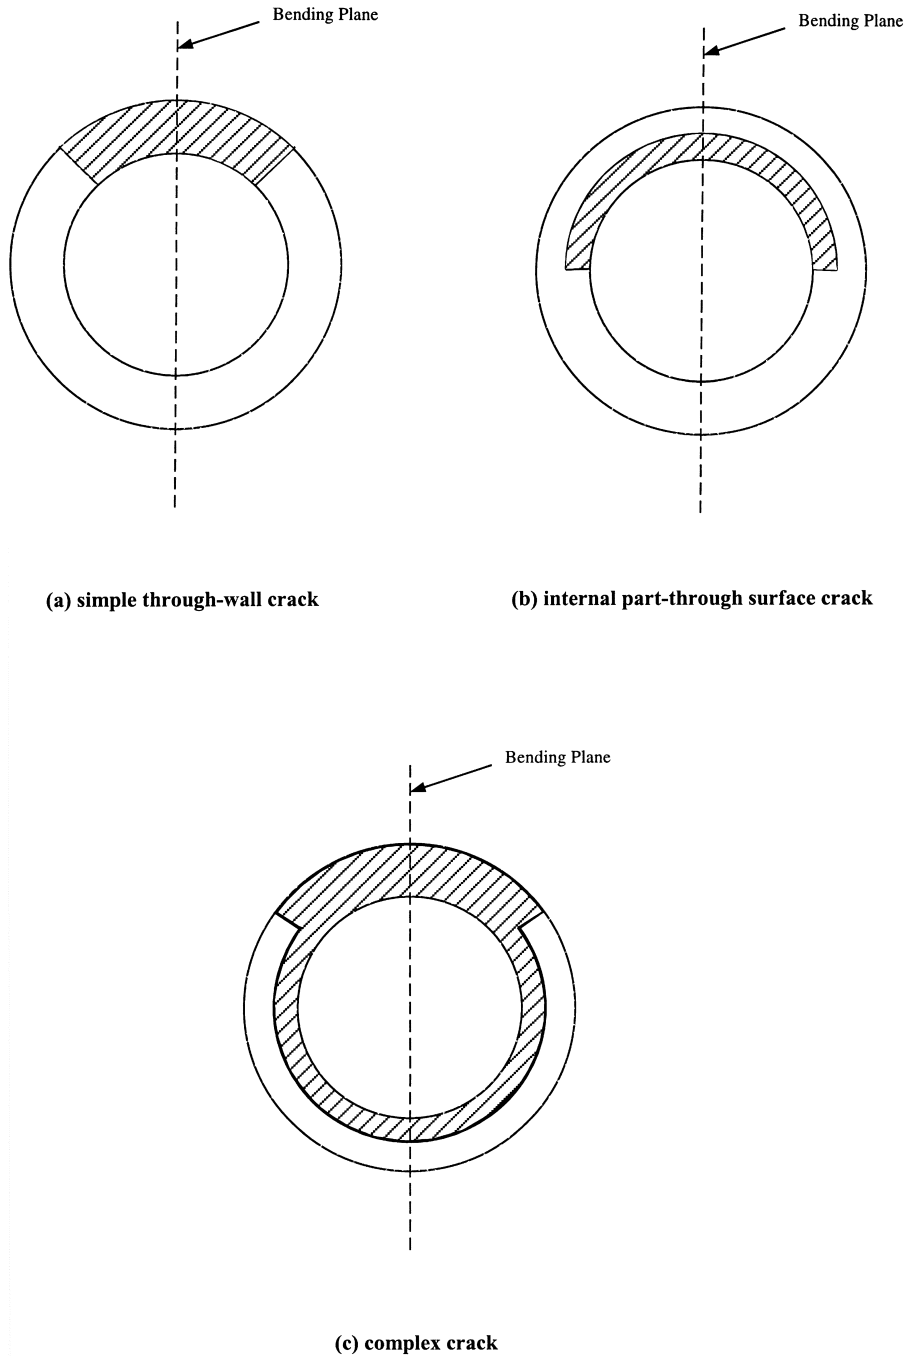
Examples of symmetrically centered cracks in pipes: (a) simple through-wall crack, (b) internal part-through surface crack, and (c) complex crack.
